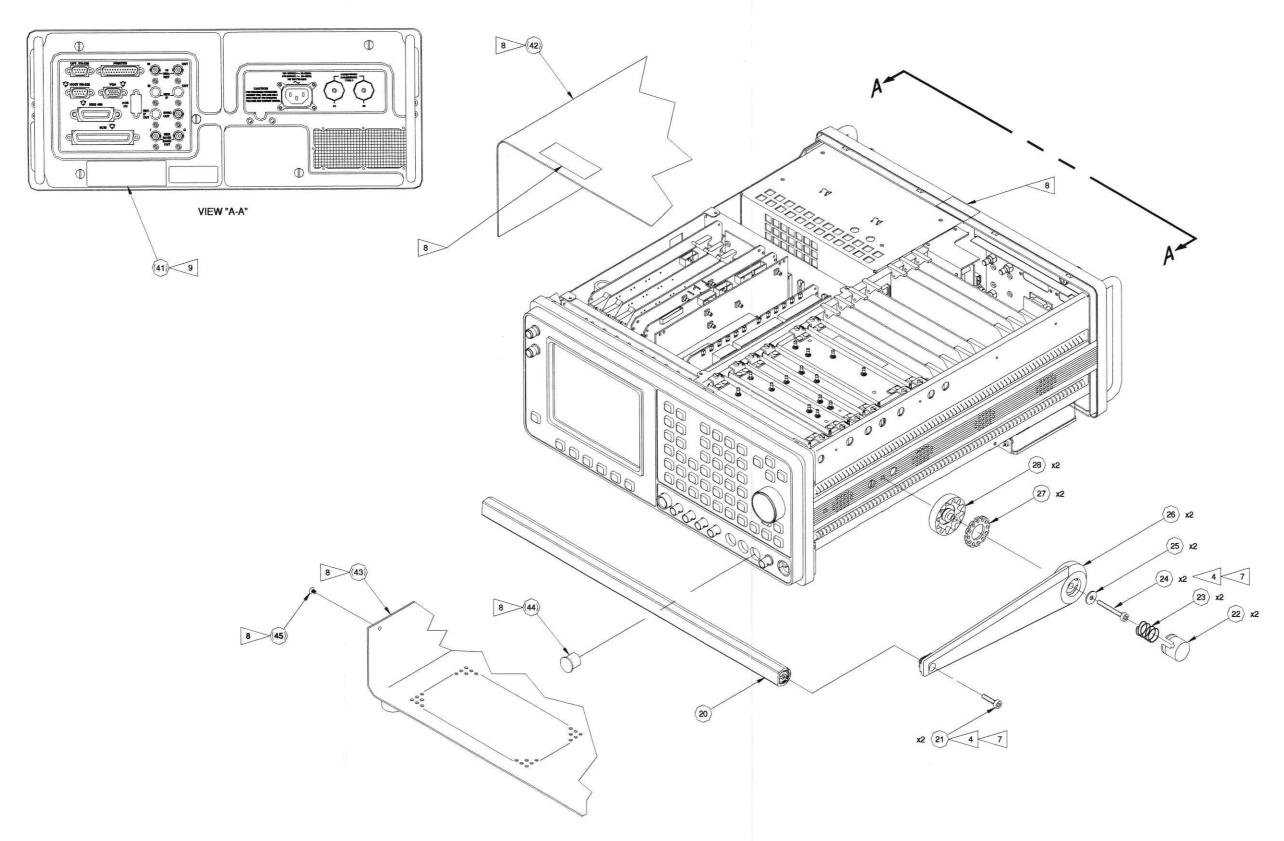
Test Set (34A5) Assembly, Cable Locator and Interconnect Diagram (Sheet 2 of 7)
